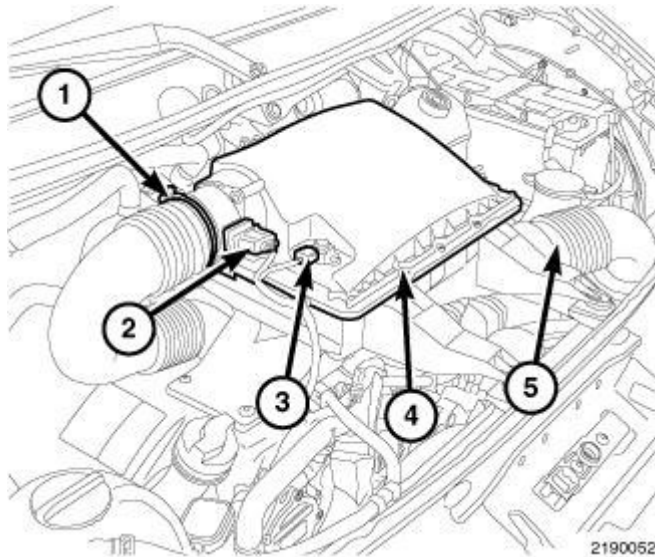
MAF HARNESS CONNECTOR & INTAKE AIR PRESSURE SENSOR
